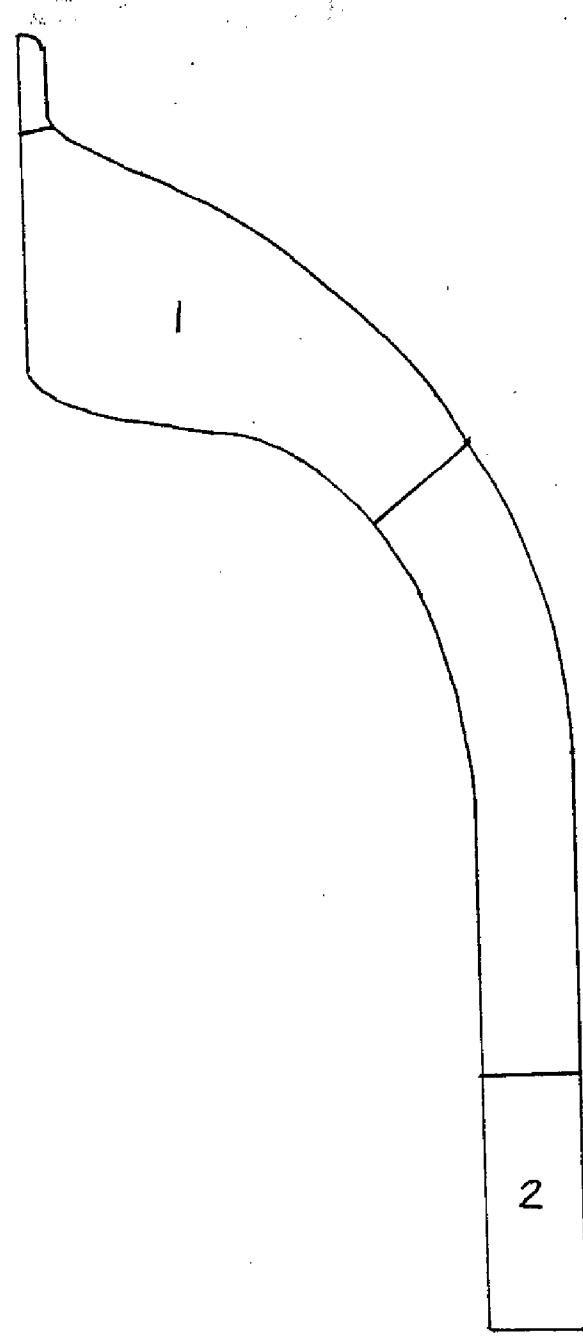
Piece of failed 6351-T6 aluminum cylinder used to obtain samples No. 1 and 2 for microhardness tests. The piece is shown as actual size (~ 3/8 in. thick).
